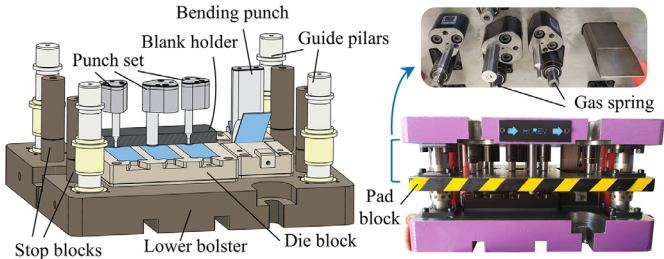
The laboratory tool system used to replicate the punching, forging and shaving operations of the novel ADFR process. The last station of the tool is used to create 90° bent specimens for destructive peel tests.
